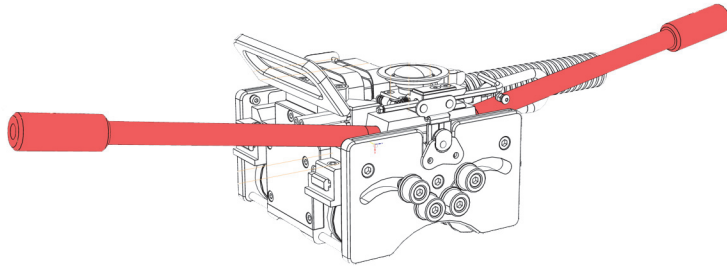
WeldROVER—Two steering levers are provided with the system
